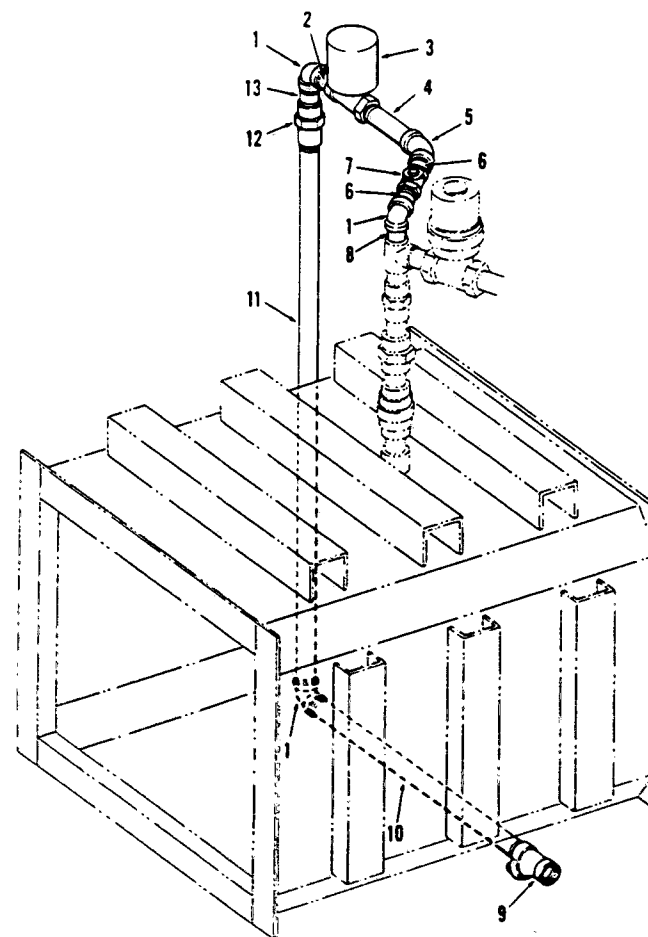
DEIONIZED WATER SUPPLY PIPING ASSEMBLY.
